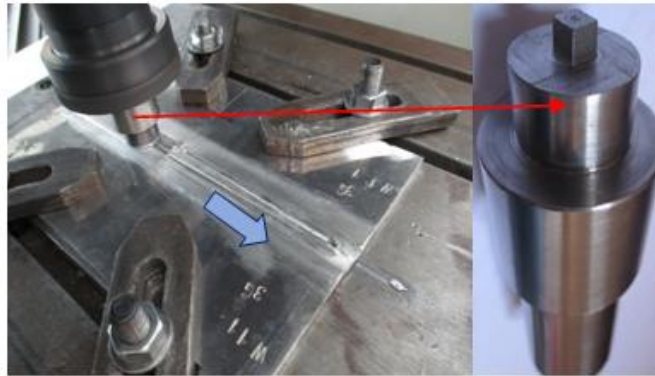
Photographs of FSP 03: MIG welded processed using tool 03 (Square pin).
